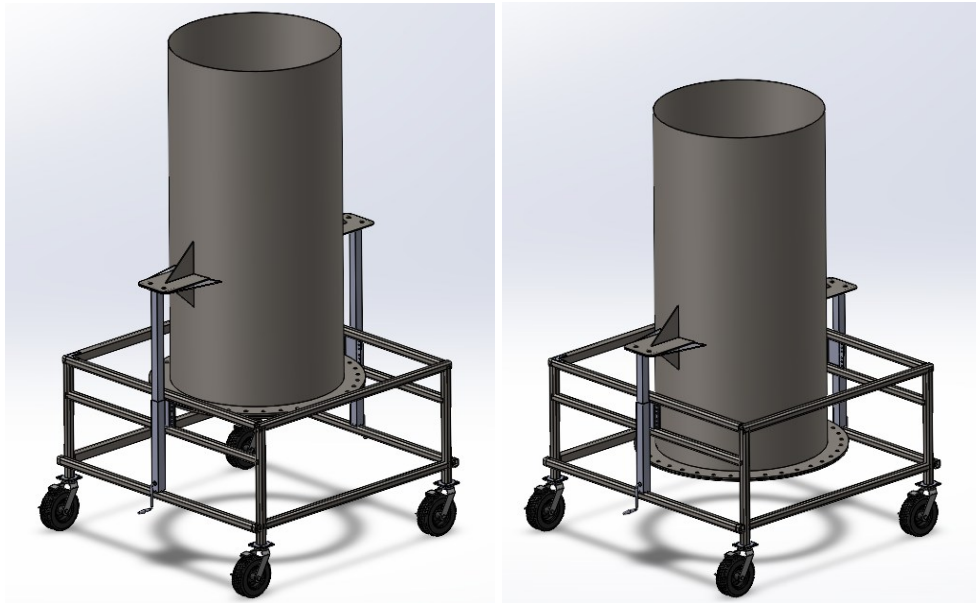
SolidWorks model of mobile, vertically adjusting chimney cart assembly in upright (left) position and lowered (right) position.
